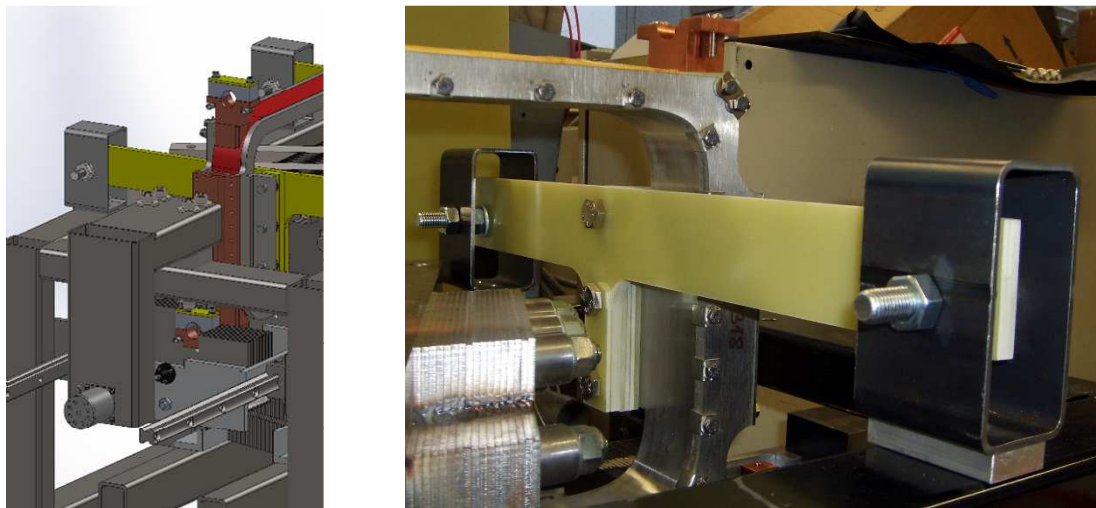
Left: position of a vacuum proof actuator motor for testing. Right: Incorporation of coil and supporting structure into machine design
